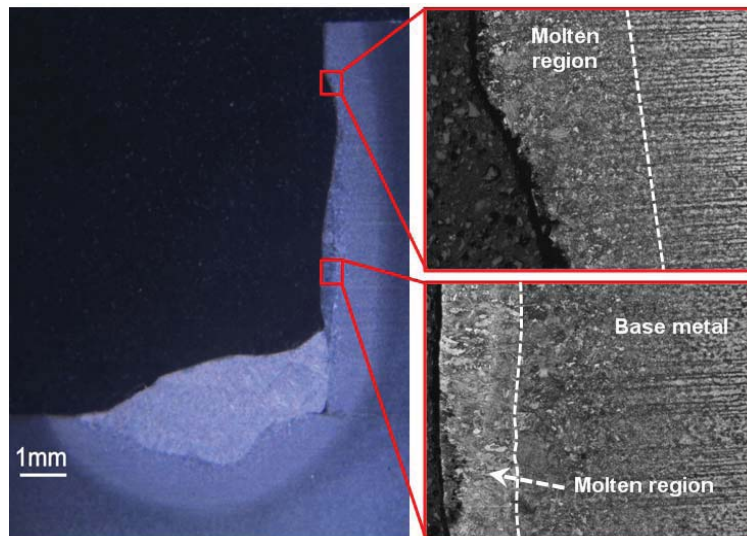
Cross section images of sample welded by a laser with the feeding of filler metal.
